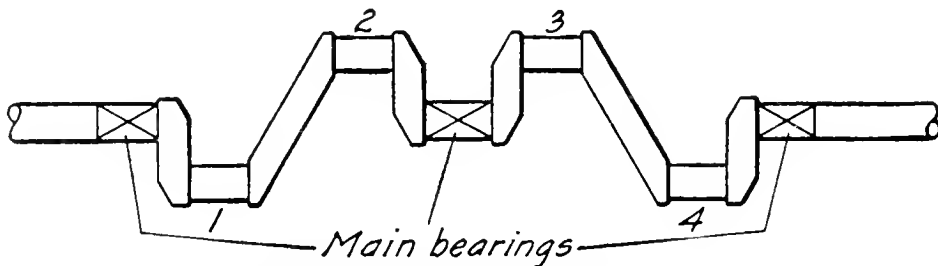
A typical three-bearing four-cylinder or four-throw crank shaft
